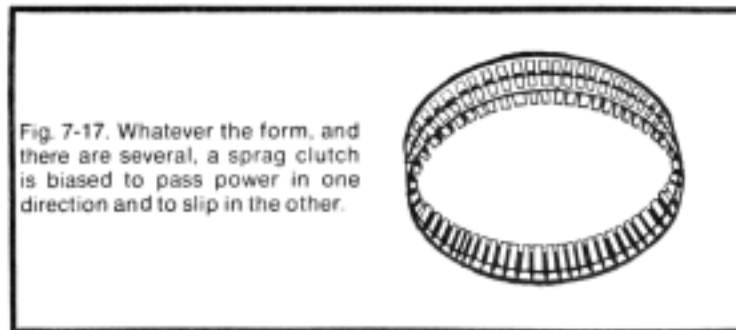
Whatever the form, and there are several, a sprag clutch is biased to pass power in one direction and to slip in the other.
